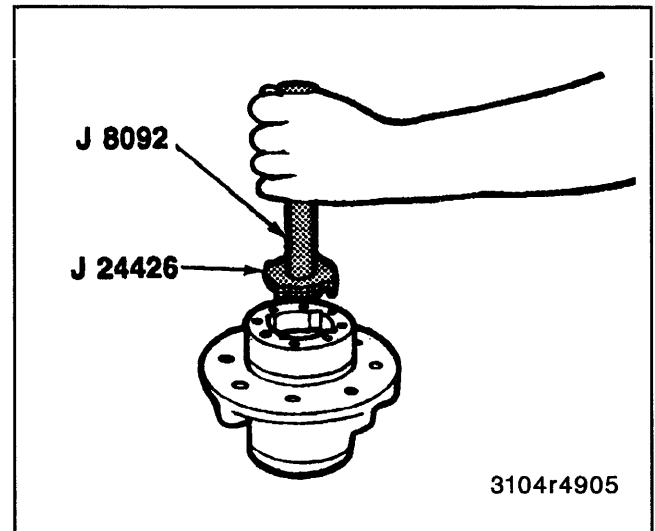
Seating Outer Bearing Cup onto Retaining Ring
